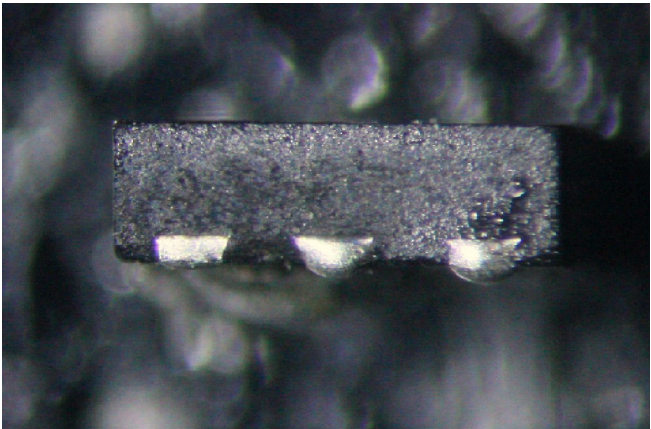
Magnification: 103X; External Side View Showing Solder Terminal Covered with Solder
